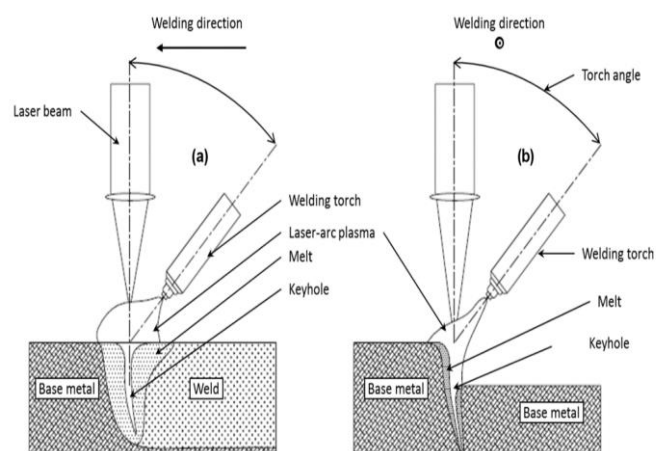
LOCATION OF ARC, SHIELDING GAS SUPPLY AND LASER TORCH
